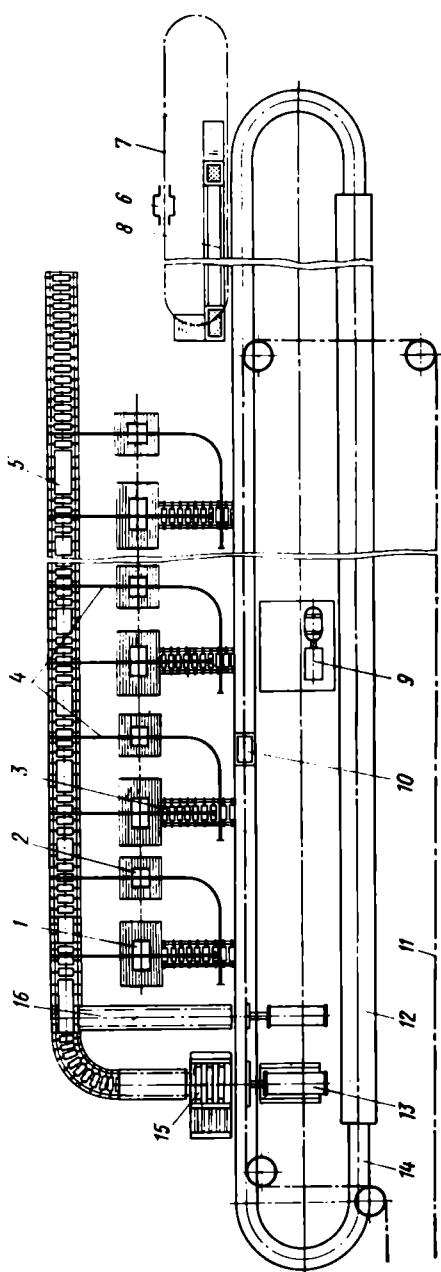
Molding conveyor system with an endless mold-handling conveyor
